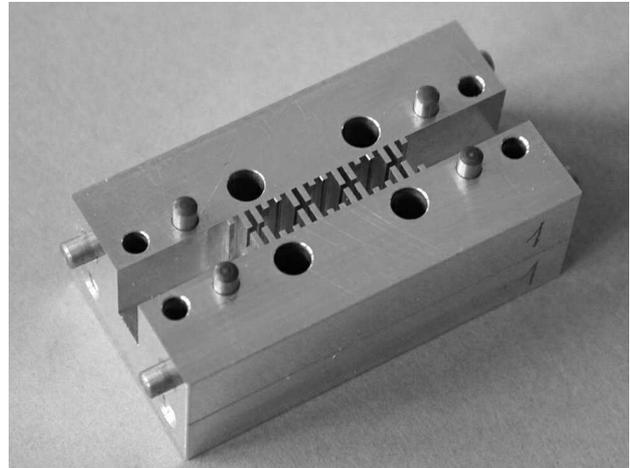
Photograph of the realized waveguide filter with one side part removed.
